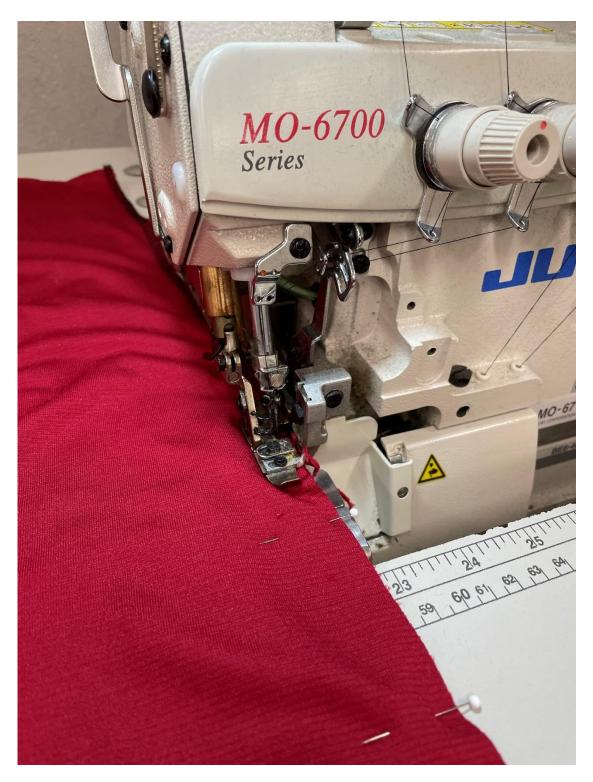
When sewing knit fabrics, I used the surging machine instead of a regular straight stitch sewing machine to ensure that the seams do not pop, they stretch with the fabric.
